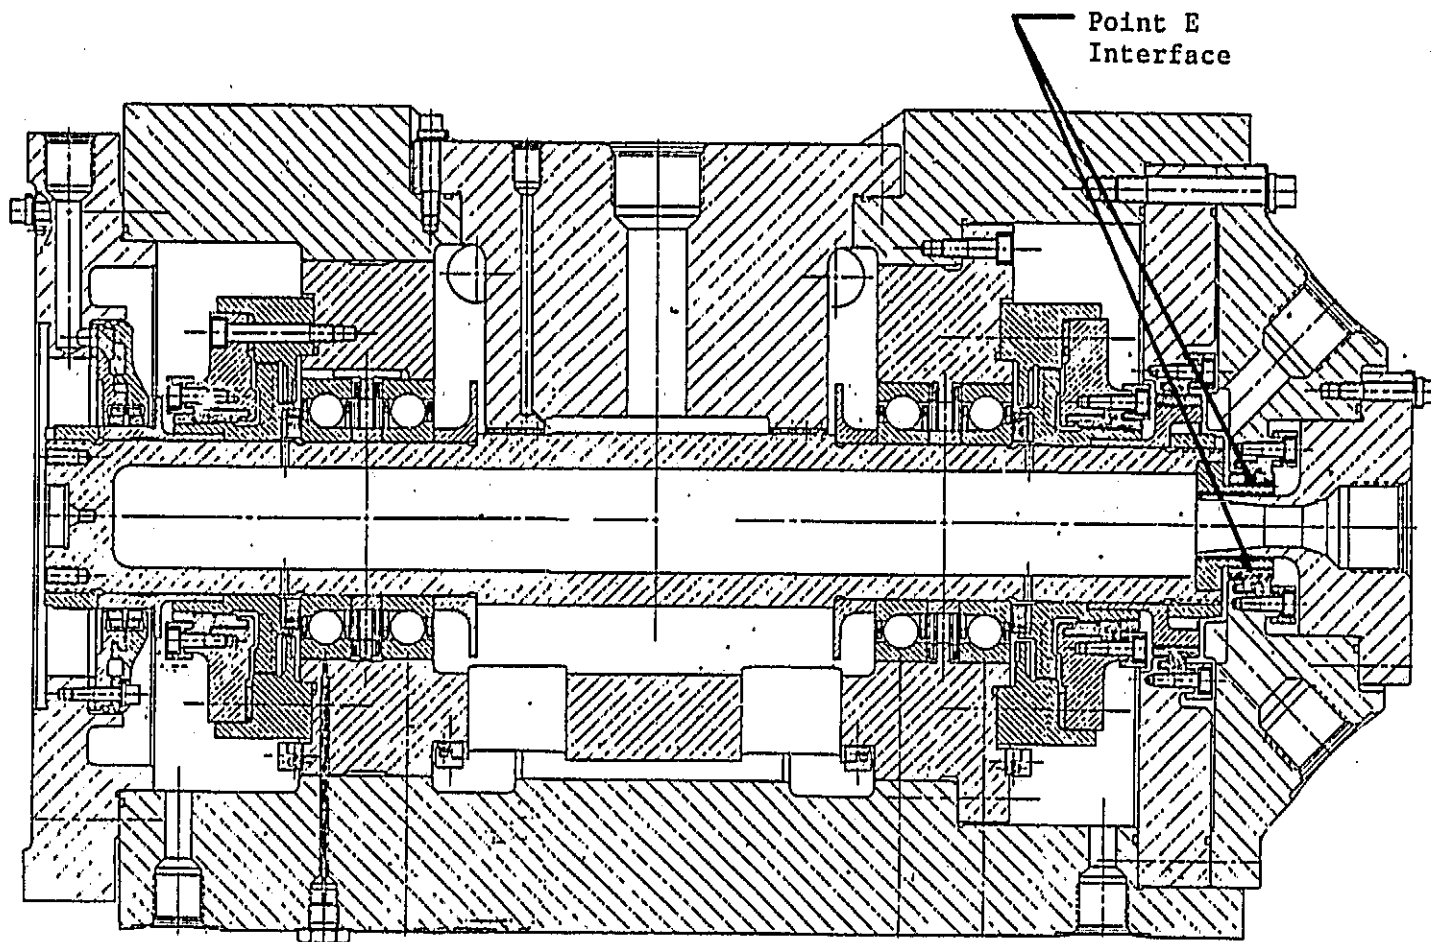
Kel F Seal-to-Shaft Extension Plug
